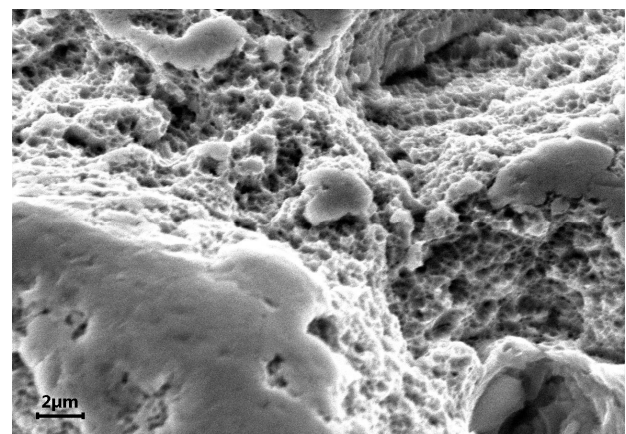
SEM image of a fracture on a 3D printed sample at 6000×, SED
